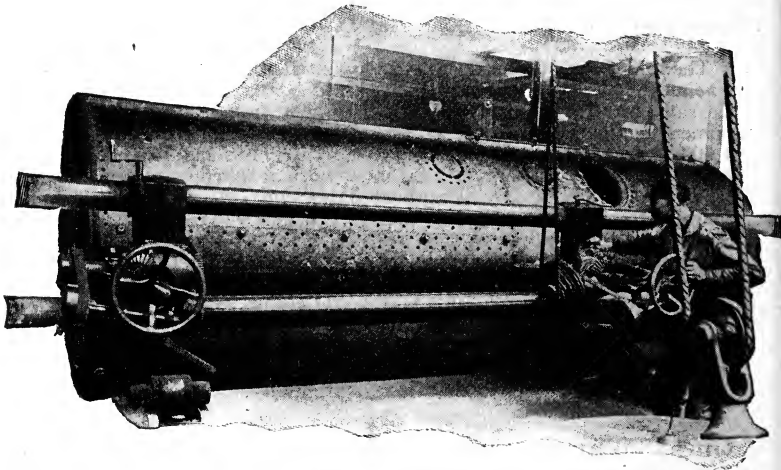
,252.—Drilling rivet holes in boiler shell by gang drill.
